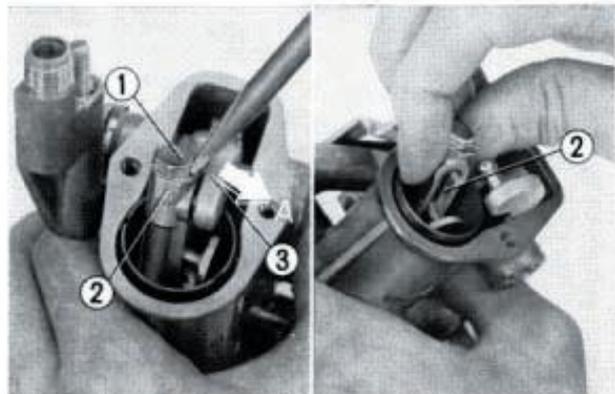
① 6 mm bolt ② Throttle shaft ③ Link arm
